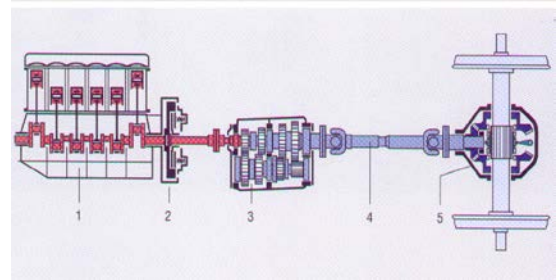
Mechanical underfloor drive system of a diesel rail car(1)Engine, (2)Multidrive clutch, (3)Four-speed transmission, (4)Cardanshaft, (5)Reversing final drive.
